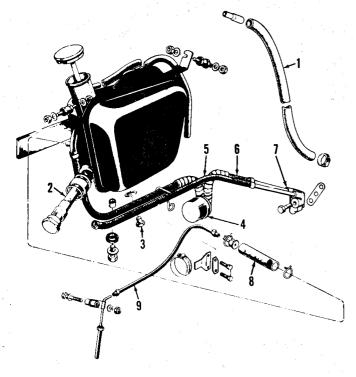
A-Typical view of oil tank, oil lines and rear chain oiler.
